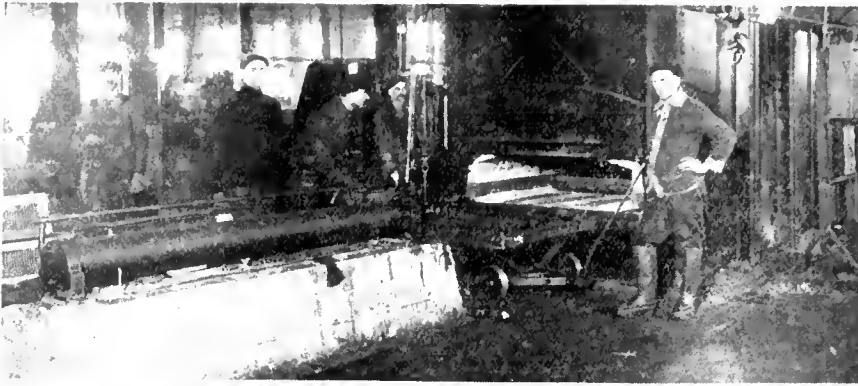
ANNEALING FURNACES SHOWING CHARGING ARRANGEMENT.
